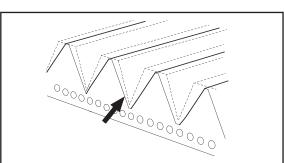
The multi-groove belt shows signs of wear. Can be reinstalled.
